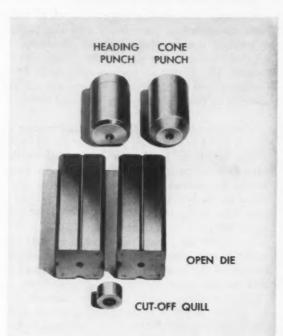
In an open die, wire is gripped in the grooves by closing gap between the die-blocks. Four different parts of the same length can be made with this die.
